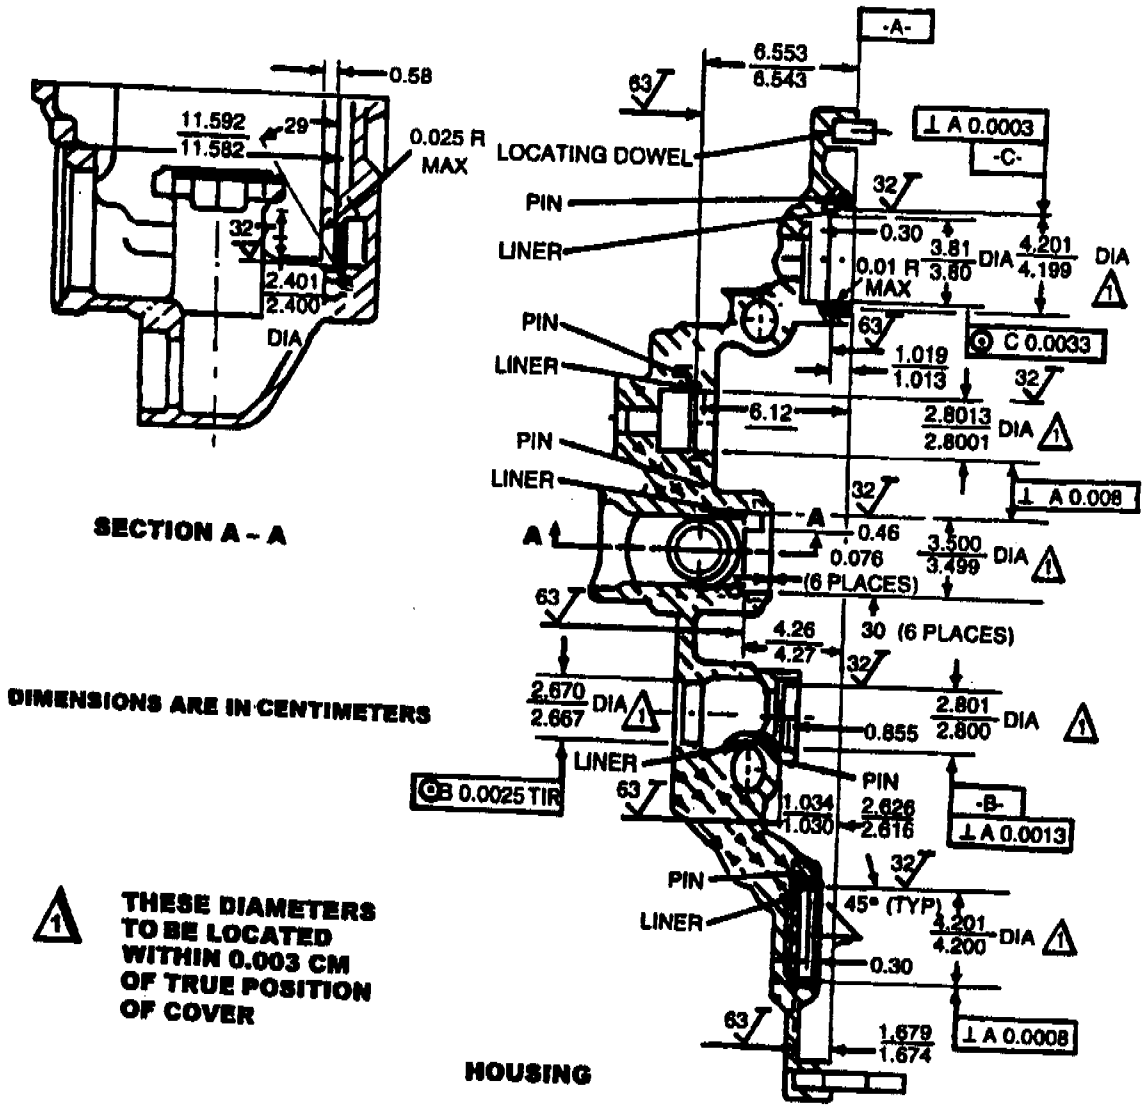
Accessory Drive Gearbox Bearing Liner Repair (Metric) (Sheet 2 of 2).
